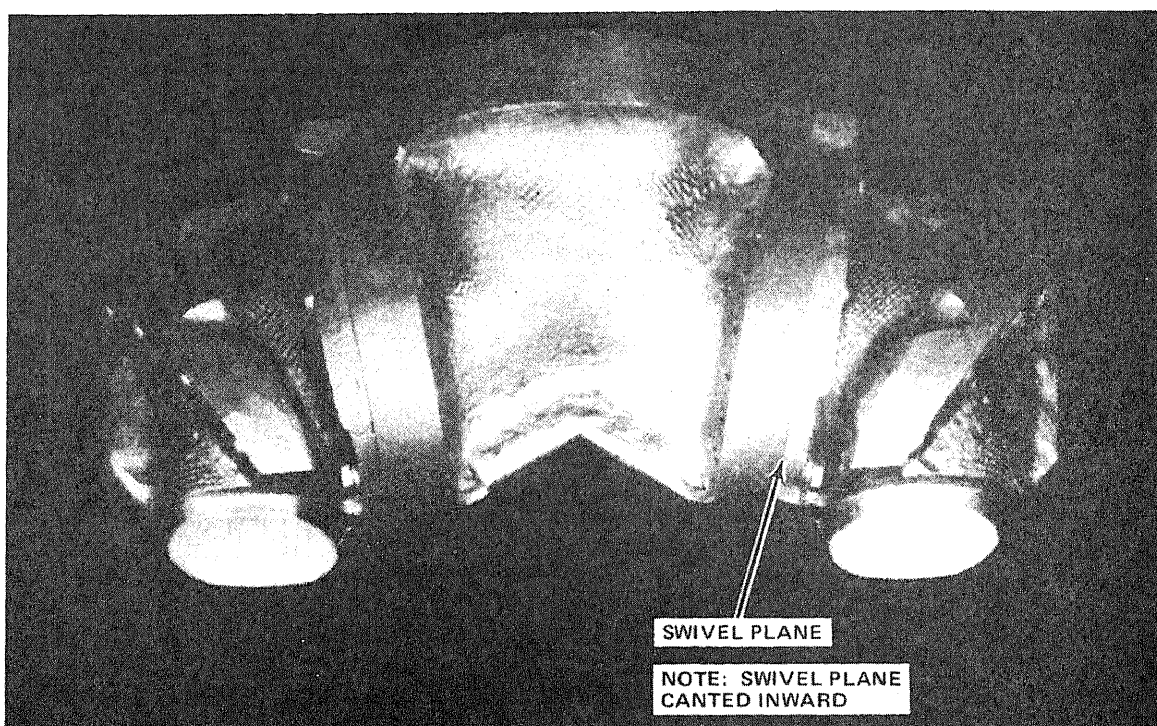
Single Bearing Swivel-Tee Plenum Nozzle
